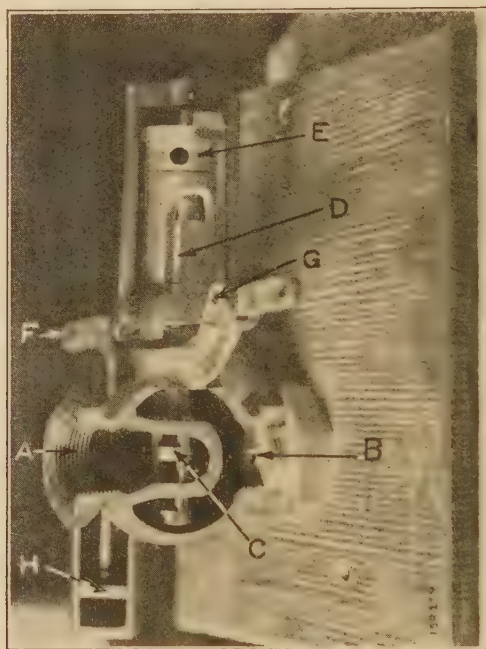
A pressure-reducing valve for steam. (Courtesy, Forest Products Laboratory.)
